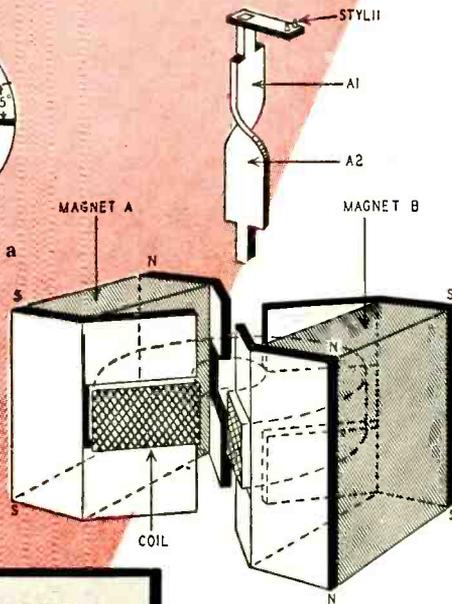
Exploded sectional view of the Fen-tone B&O 350+.
